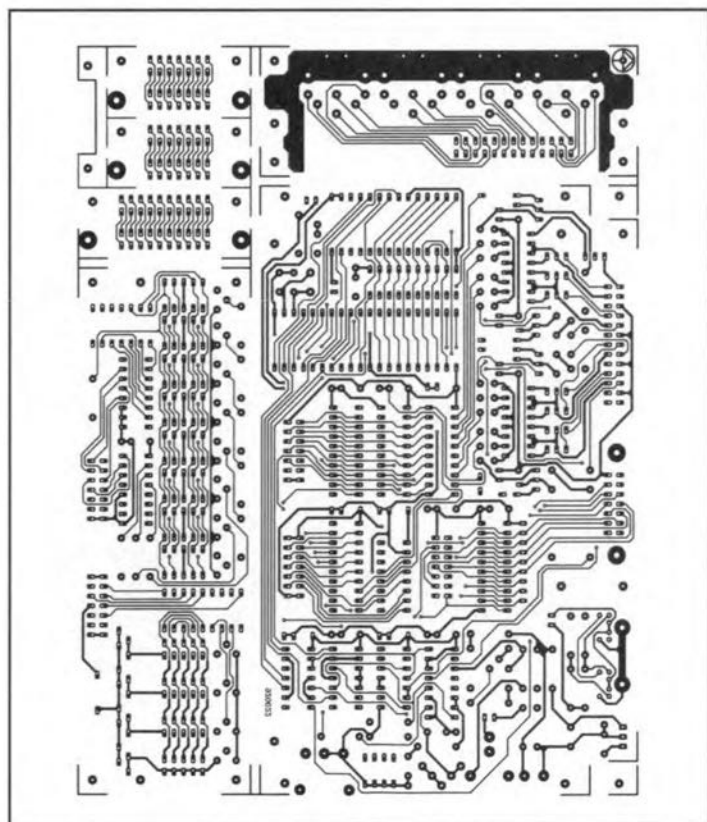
Solder side track layout (mirror image; reduced to 50%).
